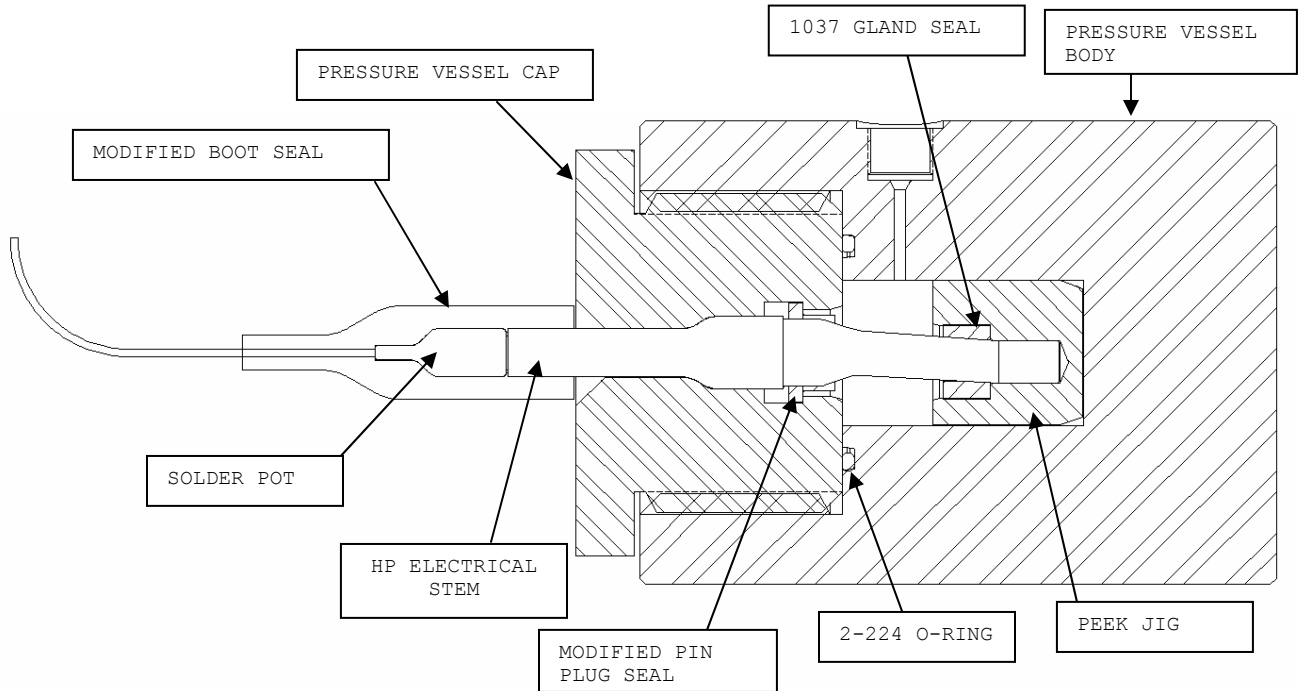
FULLY ASSEMBLED PRESSURE VESSEL TEST SET-UP
